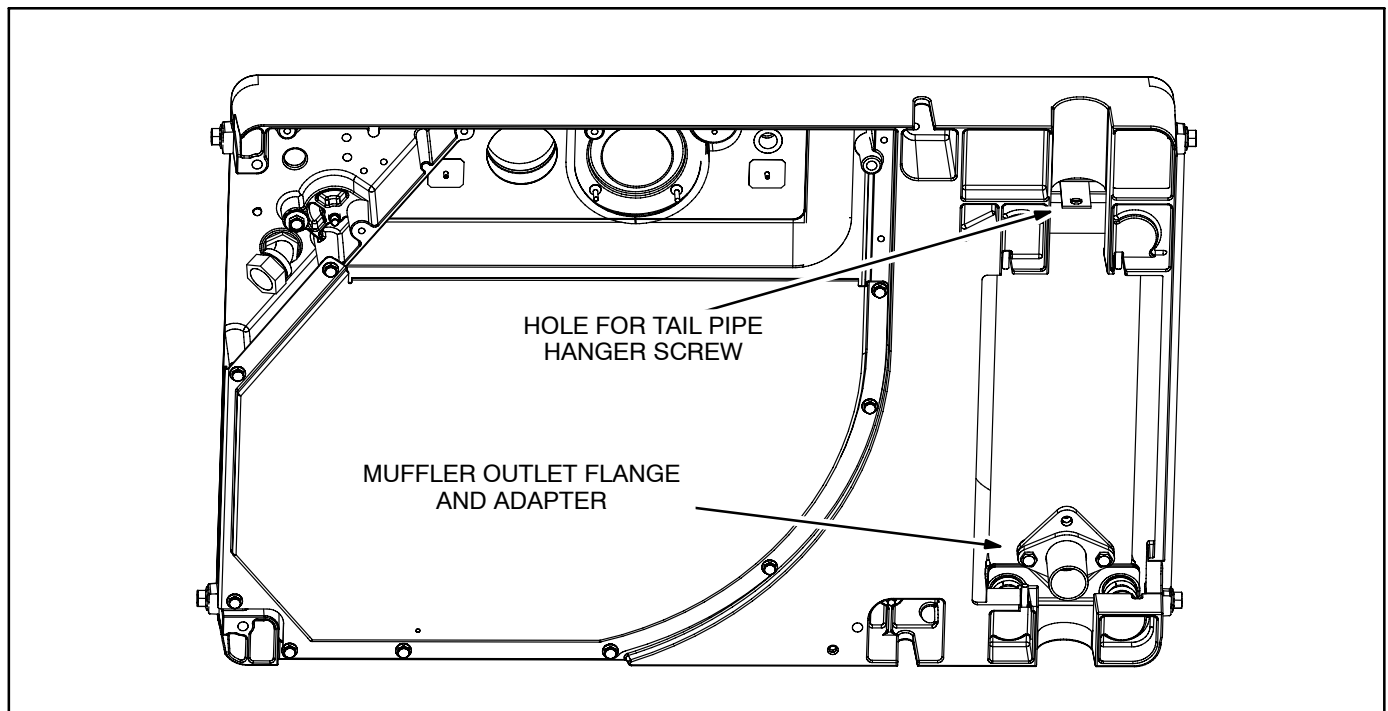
OUTLET FLANGE AND ADAPTER ON MODELS WITH INTERNALLY MOUNTED MUFFLERS
